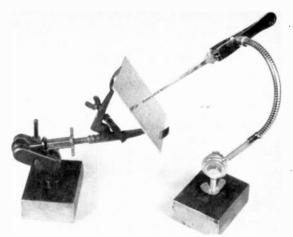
PC BOARD HOLDER is built from a test-tube holder.
